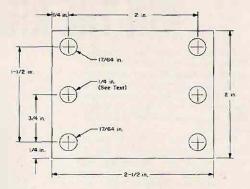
Shunt clamp plate. Note; (1) Two plates are required; (2) One of the holes marked for $\frac{1}{4}$ in. hole in one of the plates is drilled with a $\frac{1}{46}$ drill and tapped with a $\frac{1}{4} \times 20$ tap. This will ride on the threaded rod which, when turned, moves the shunt in and out of the core.
